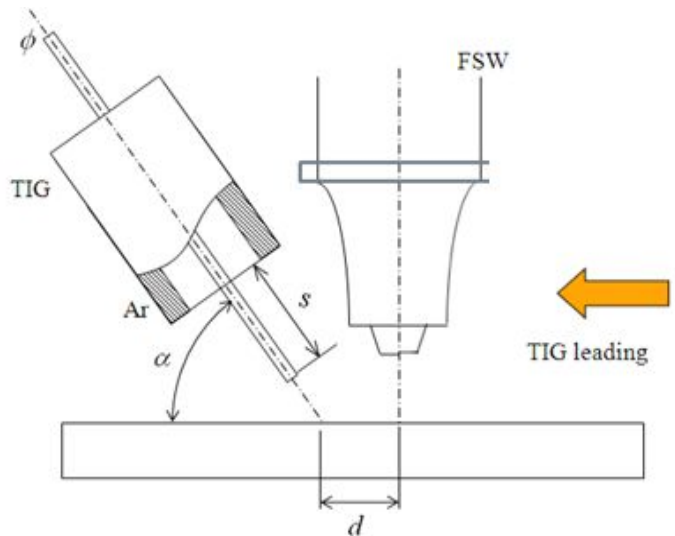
Schematic of TIG assisted FSW welding process
